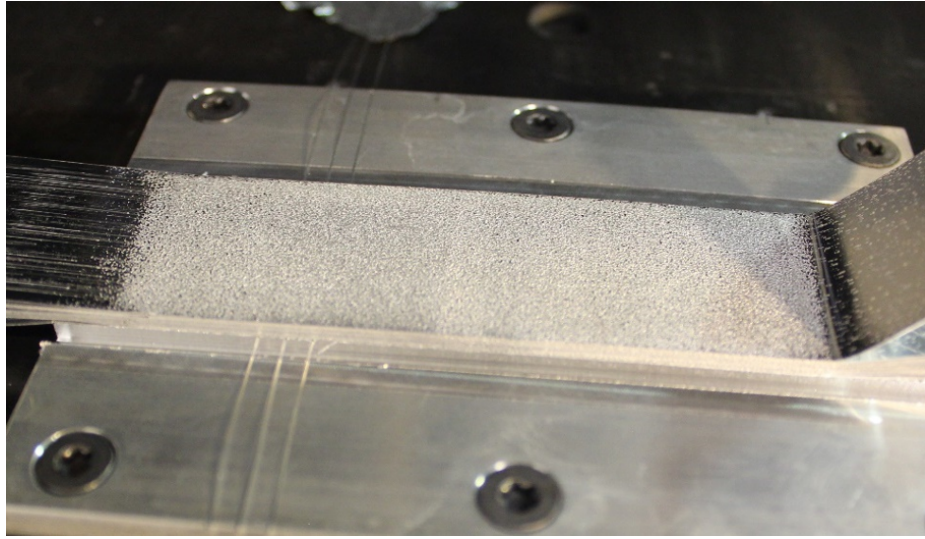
Additional layers are then welded with UAM over the FBG sensors.
